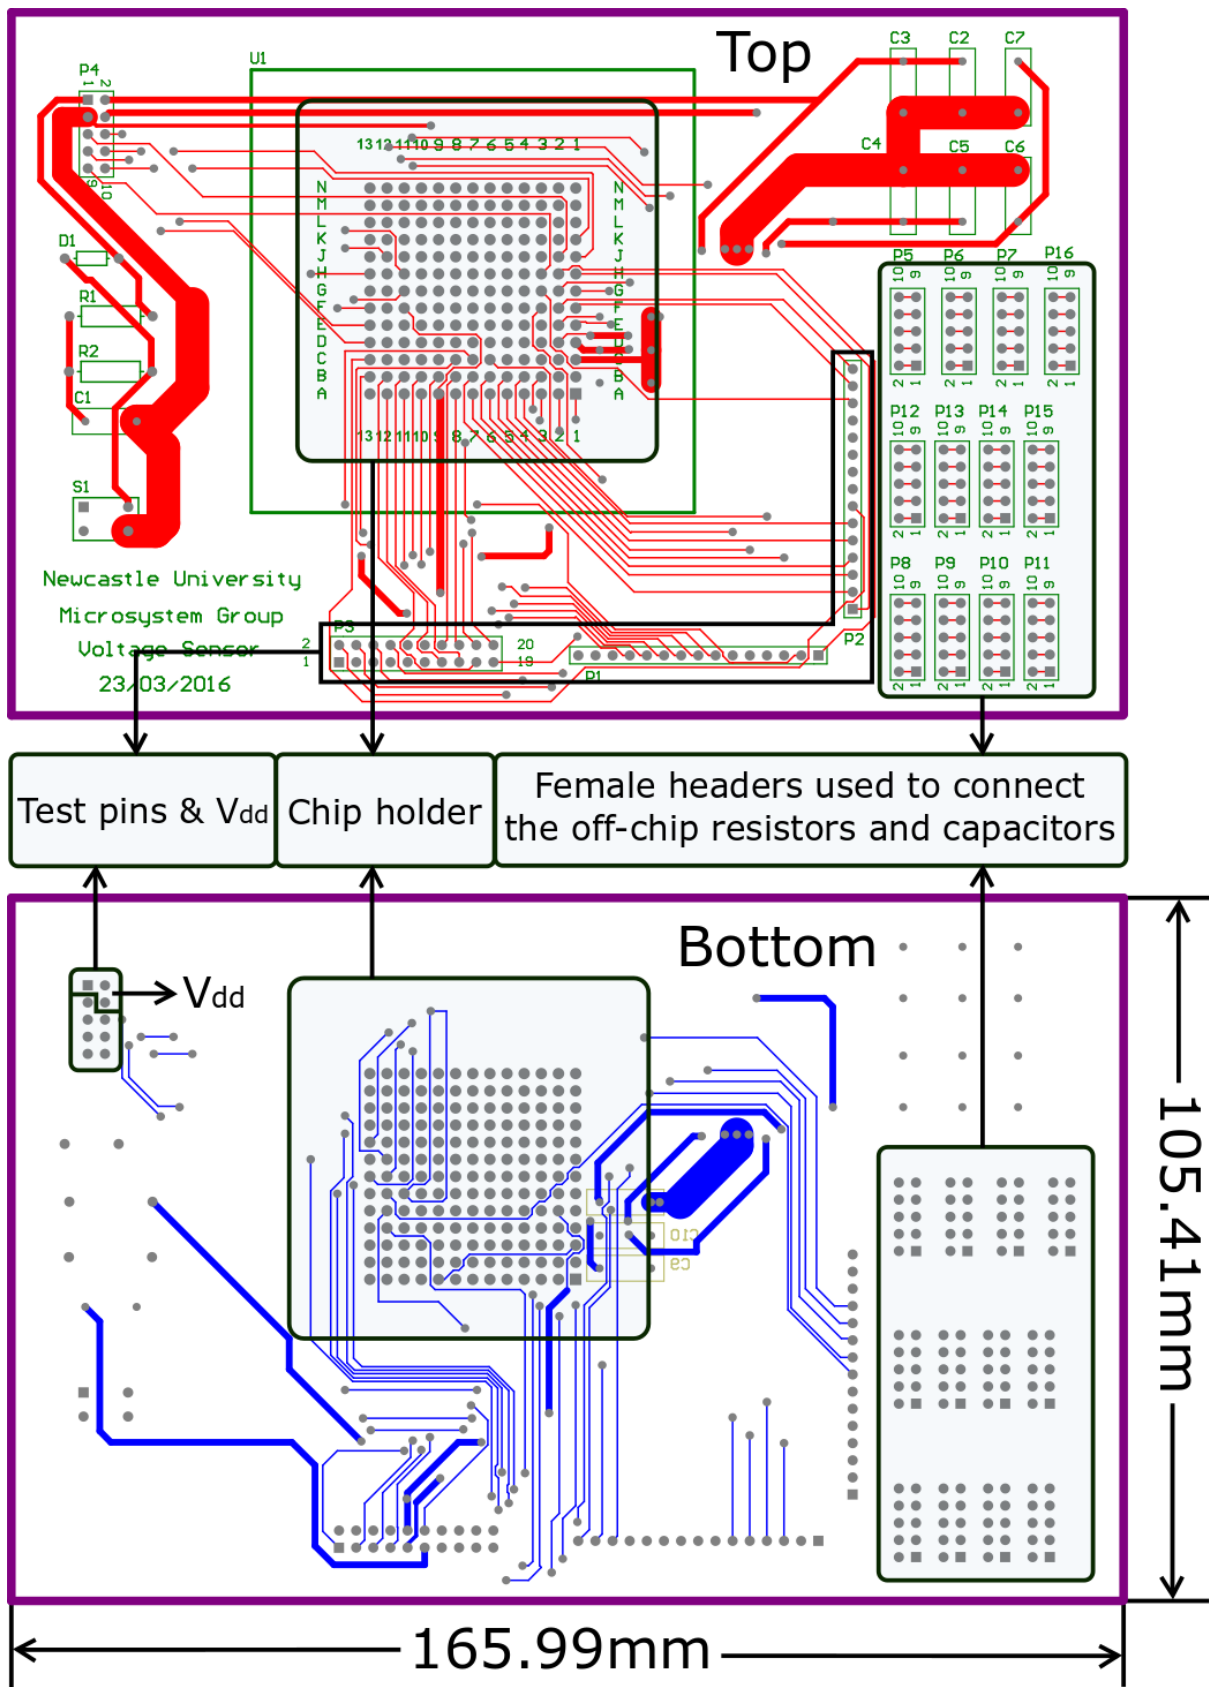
PCB layout. The female headers, test pins, chip holder and  $V_{dd}$  have been marked.
